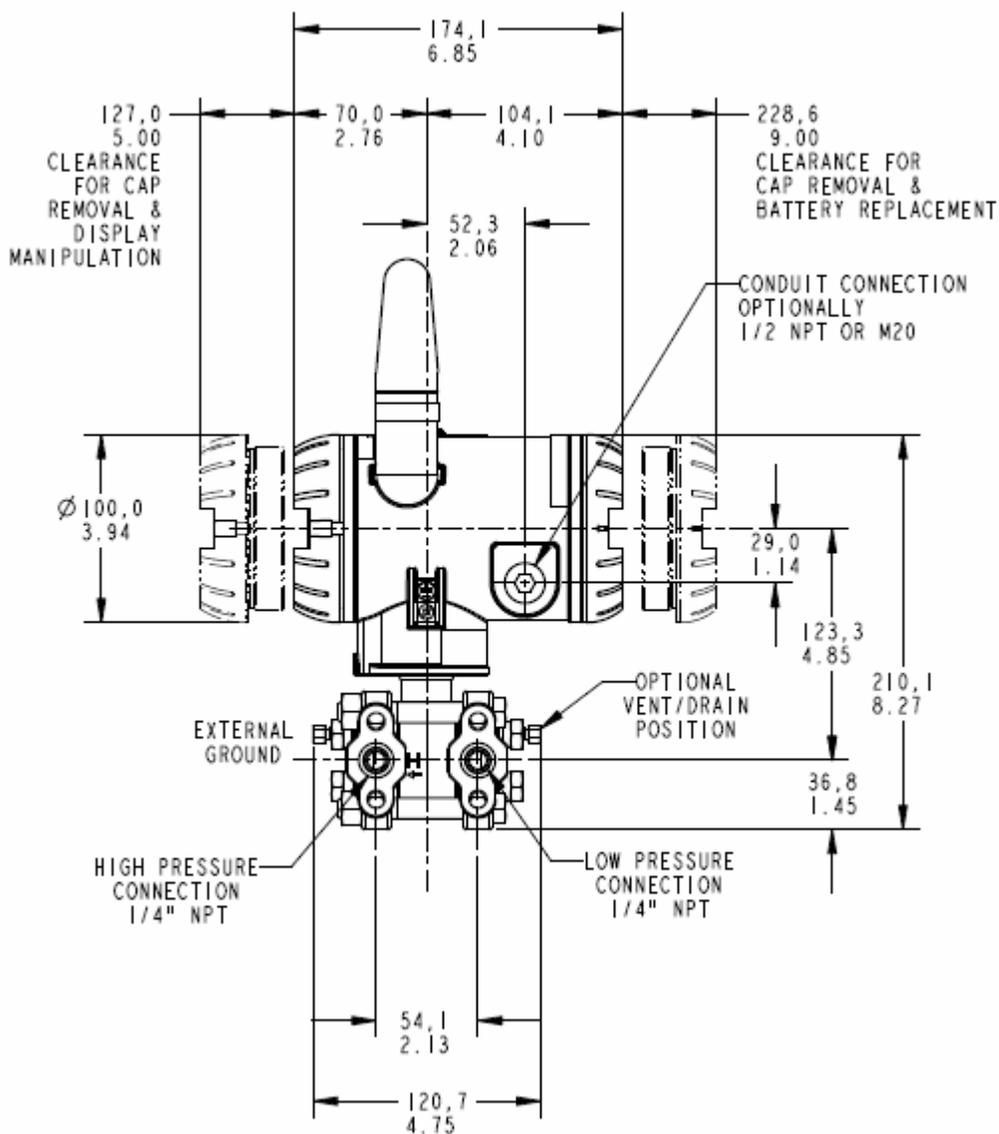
Typical dimensions for dual-head models STGW944 and STGW974 (side view)
